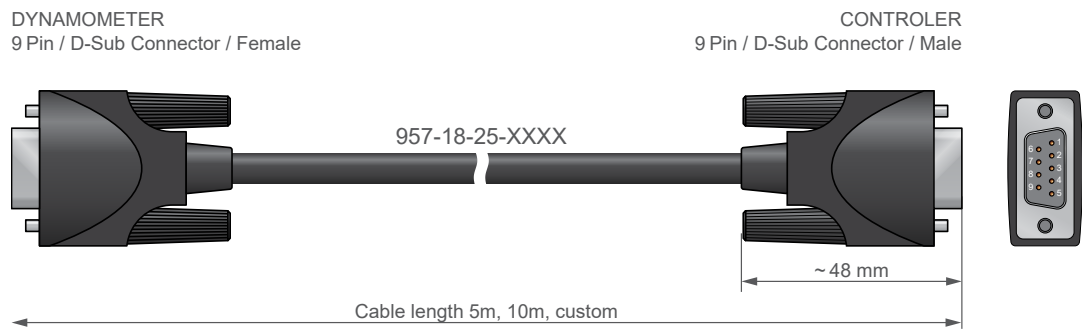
Cable 957-18-25-XXXX - Configuration
